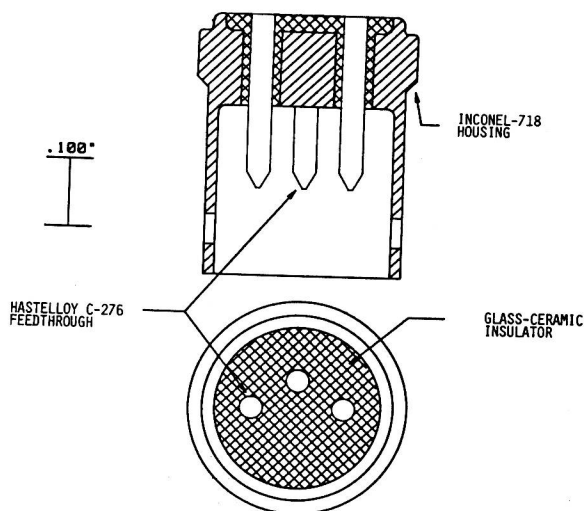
Cross-sectional view of a typical glass-ceramic header showing housing, metal feedthrough and glass-ceramic insulator.
